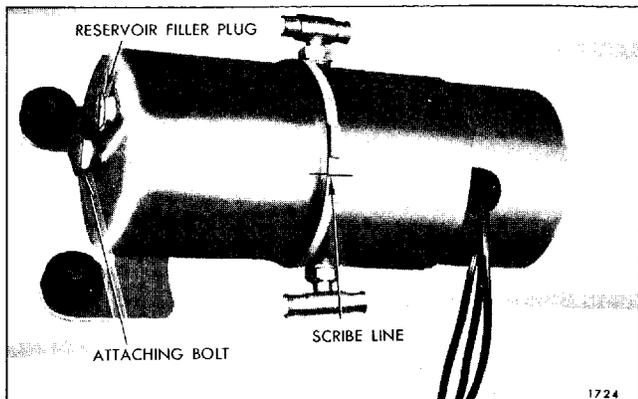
Hydro-Lectric Motor And Pump Assembly
